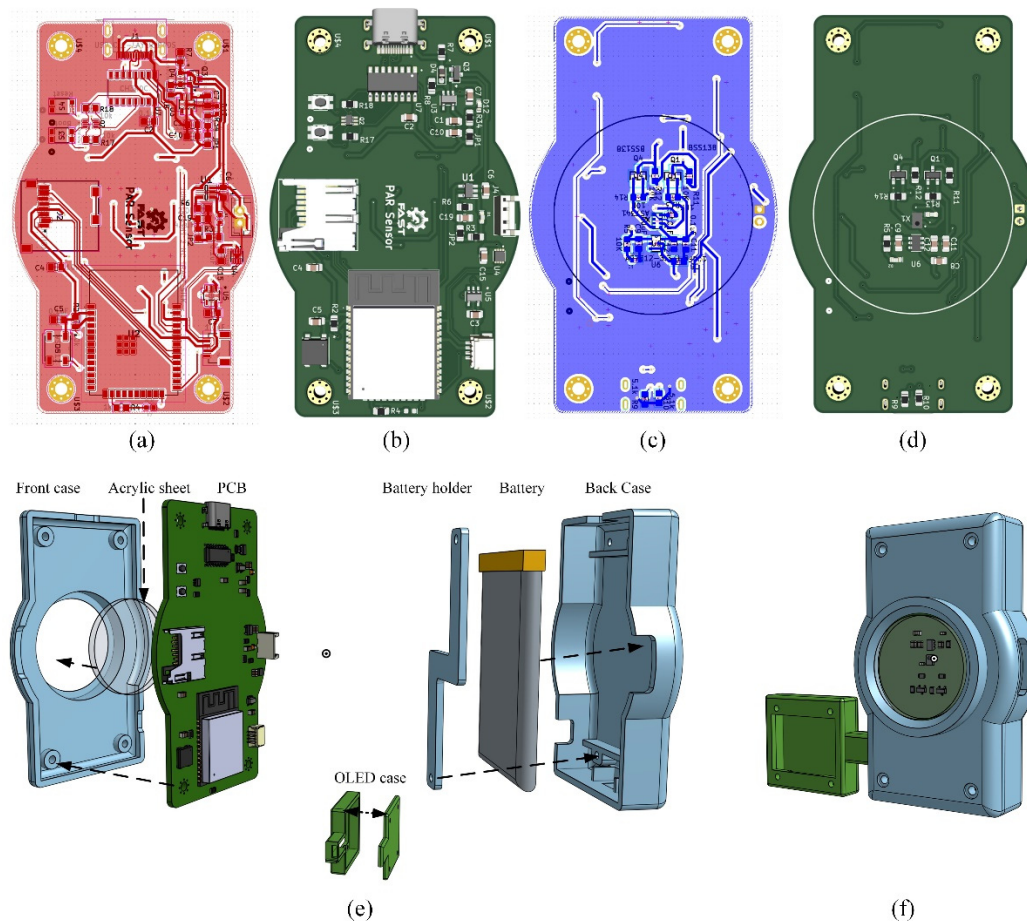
(a-d) PCB layout and 3D visualization of the PCB, (e) Encloser design and assembly and (f) Assembled 3D model of the sensor.
